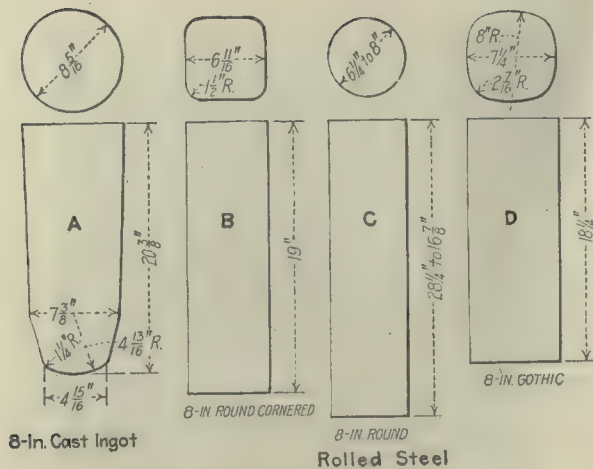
DIMENSIONS OF CAST AND BAR INGOTS
